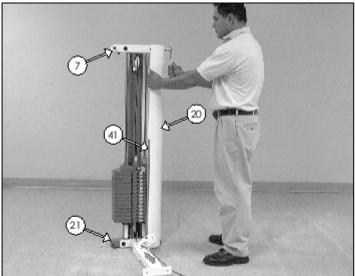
Affix the Weight Shroud w/Plate (#20) to the bottom of the Weight Stack Frame (#21) and at the top of the Guide Rod Retainer (#7) using four Hex Head Cap Screws 1/4-20 X 3/4 (#53), and four Flat Washers 1/4" (#47).
